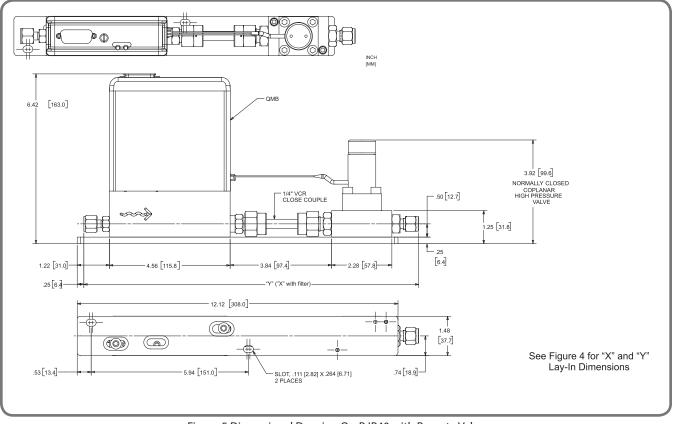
Dimensional Drawing QmB IP40 with Remote Valve
